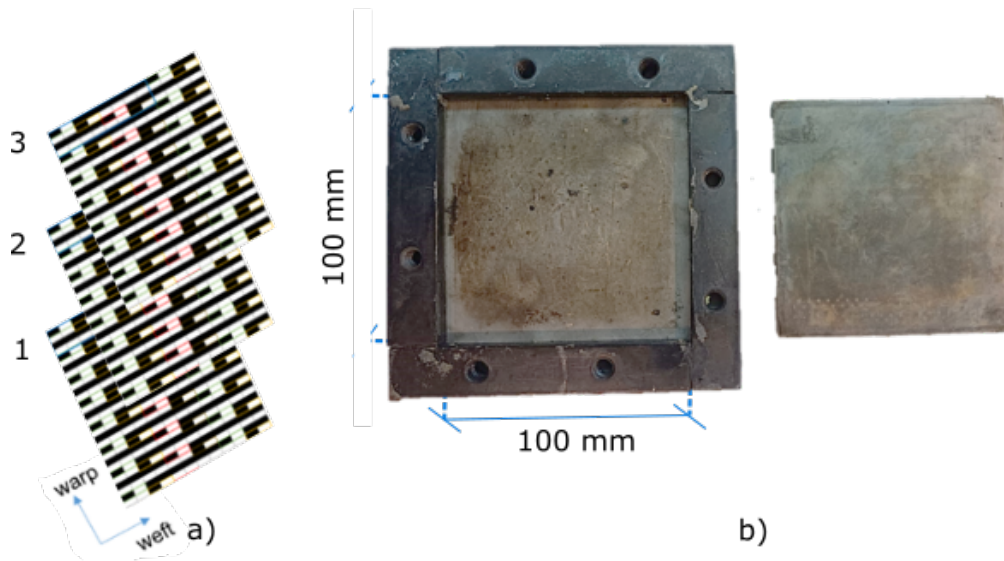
a) Schematic how the three layers of weave are introduced in mould b) Steel mould used in the production.
